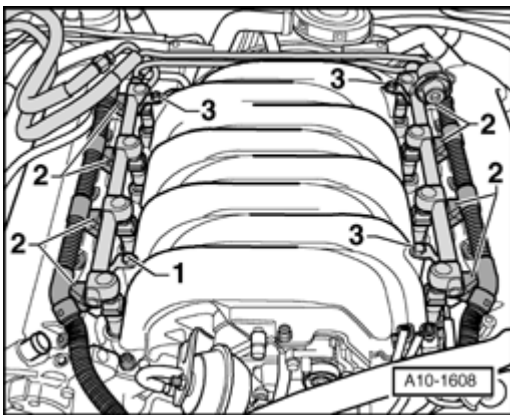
Identifying Hose, Fuel Injectors Connectors & Fuel Distributor
